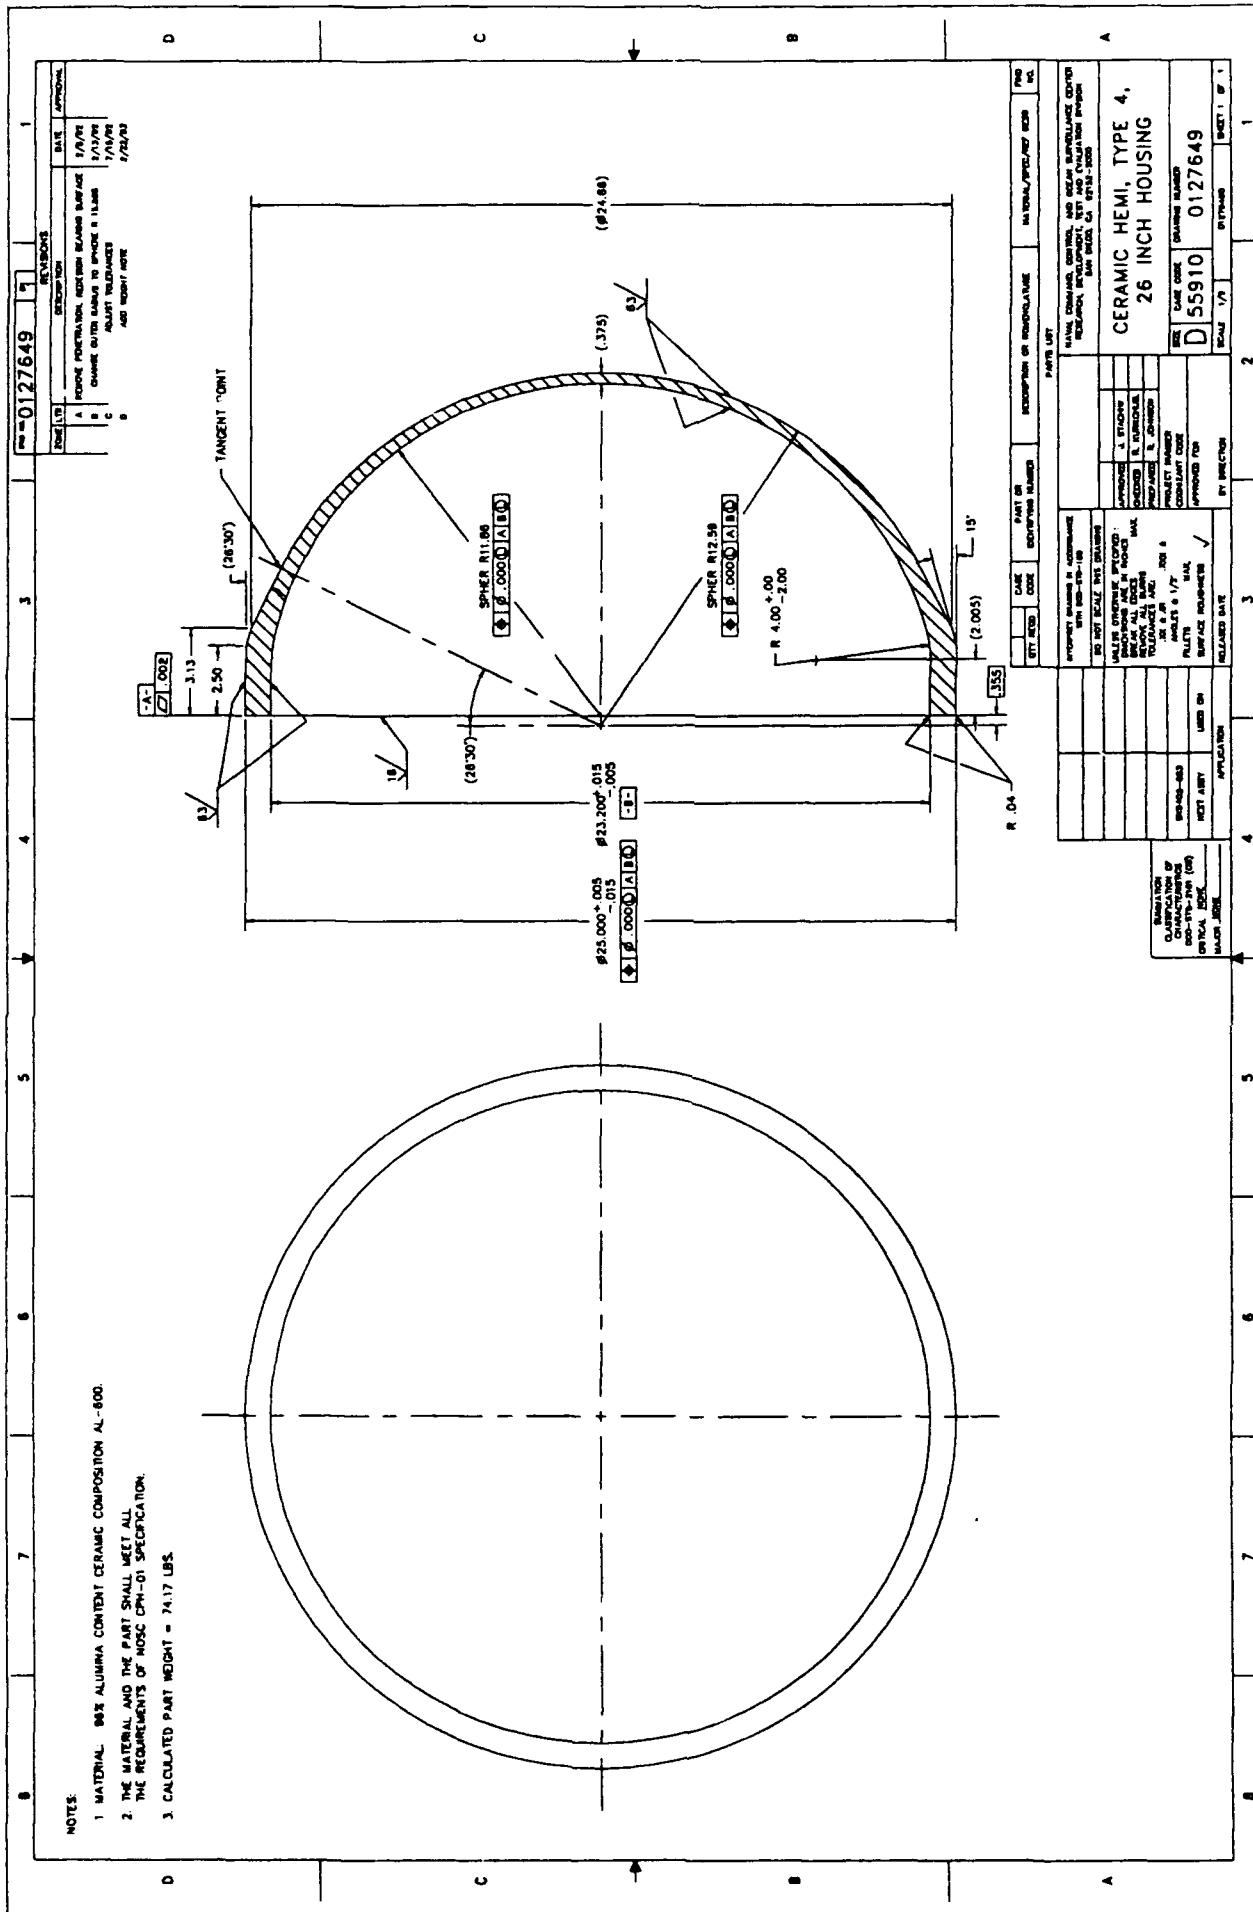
Engineering drawing of the 26-inch-housing alumina-ceramic Type 4 hemisphere.
